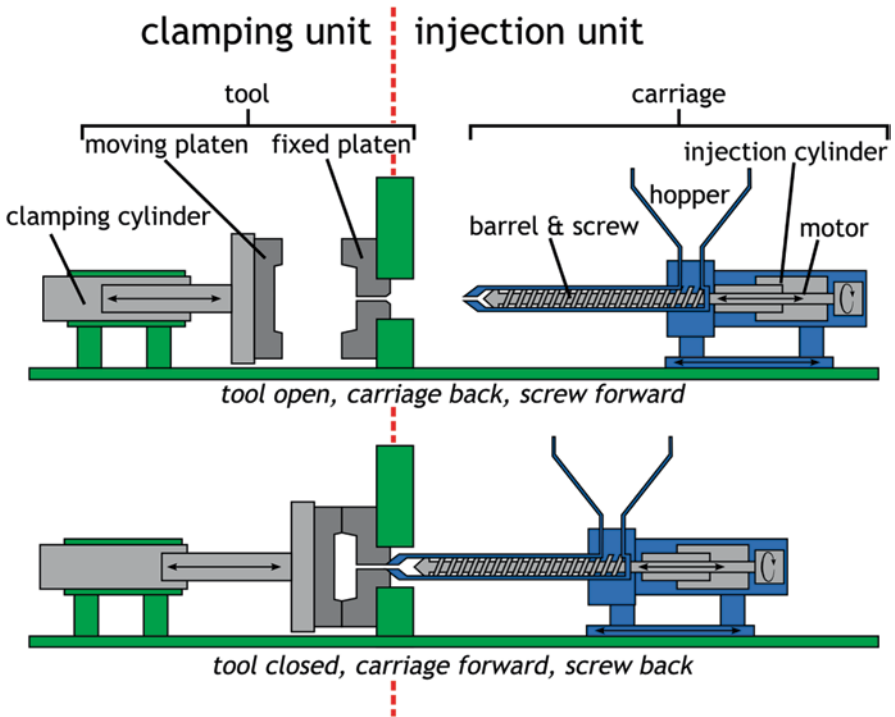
Schematic of a typical hydraulic injection moulding machine
